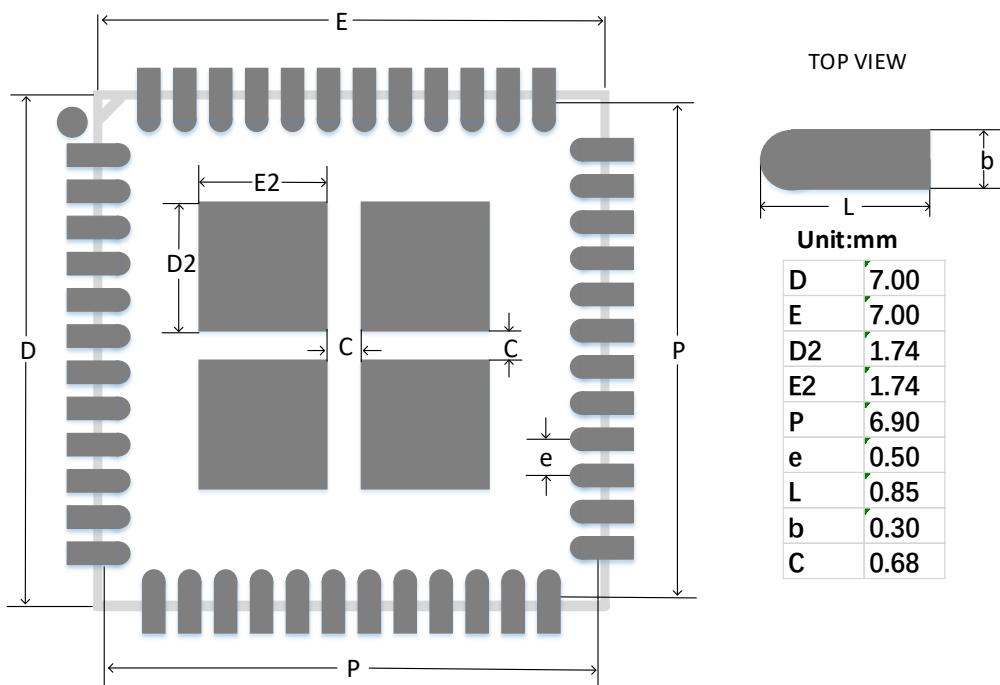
Recommended PCB Layout QN48X/QN48XF
